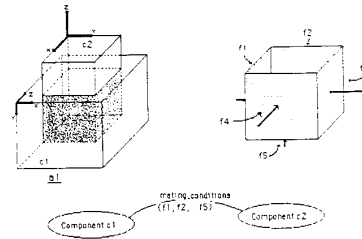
(a) A Peg-in-hole assembly. (b) The mating faces. (c) The link between c1 and c2.
